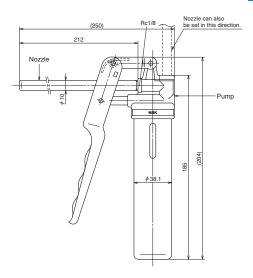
NSK Hand Grease Pump with NSK straight nozzle
